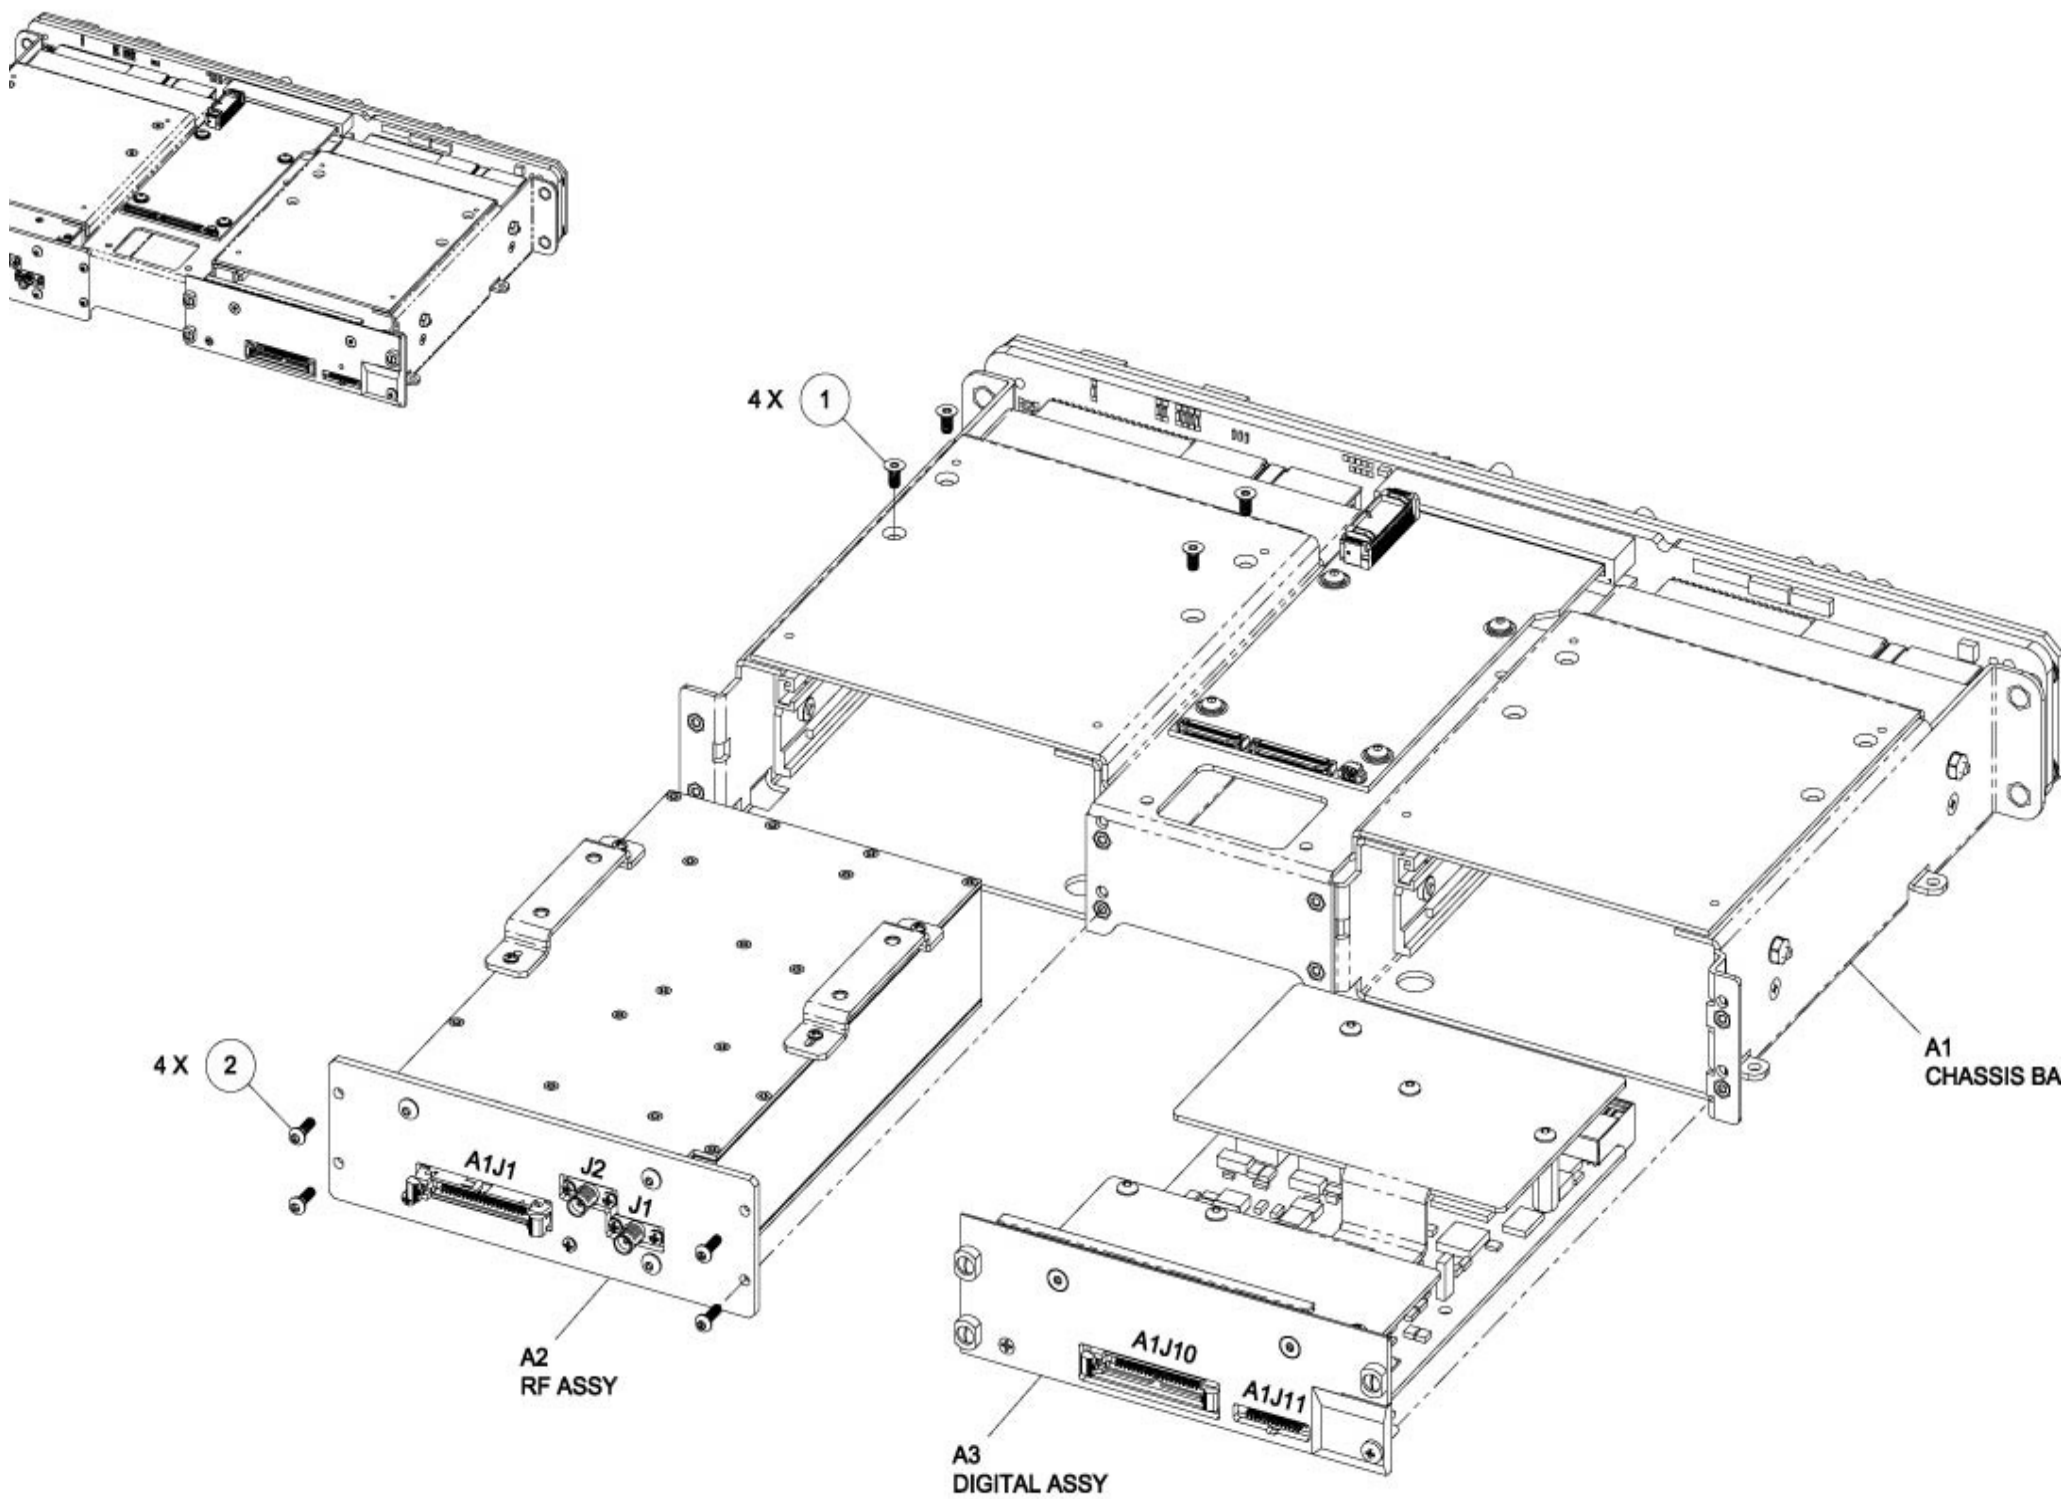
A1T-8000 Chassis RAD/ALT Mech Assembly (A1A2A2)
